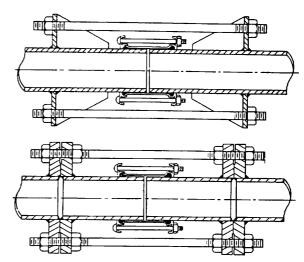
SUGGESTED HARNESS DESIGNS FOR FLEXIBLE COUPLING JOINTS
